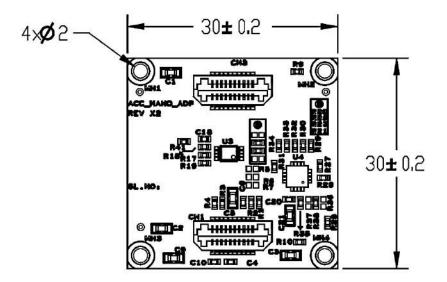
Front View of e-CAM30\_CUNANO Adaptor Board Mechanical Dimensions
